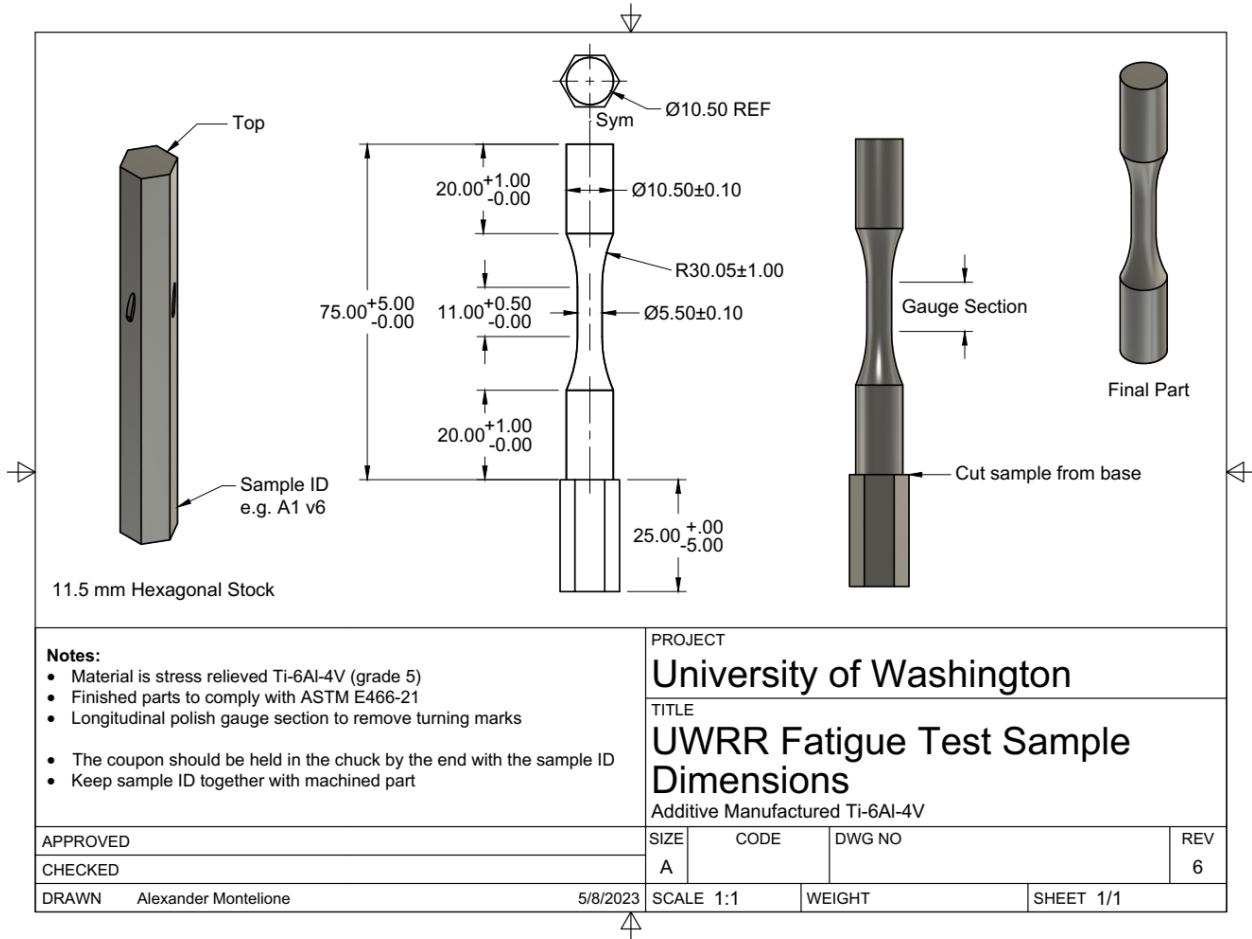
Machined fatigue specimen dimensions. Specimen dimensions shall conform to ASTM E466-21 [13] subsize after machining.
